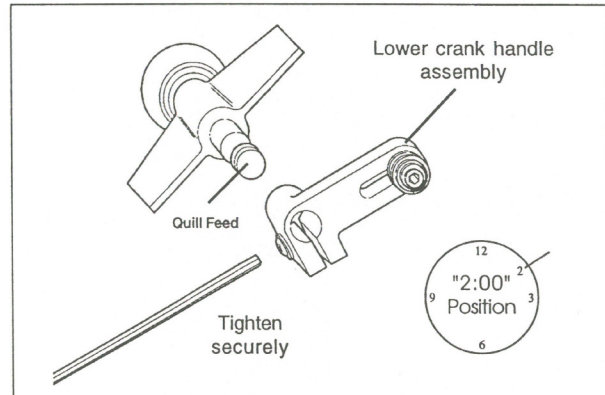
Attach Lower crank handle assembly in "2:00" position.
